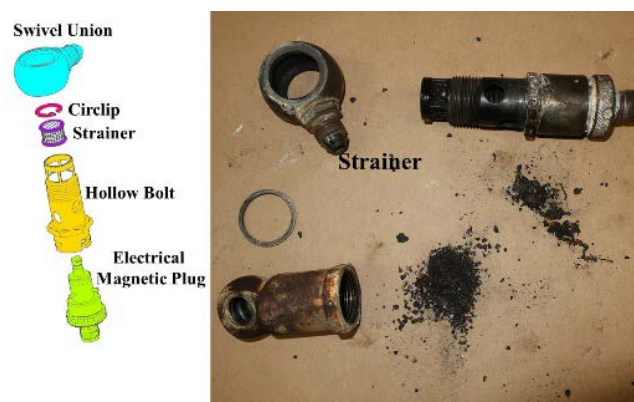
NO. 2 ENGINE REAR BEARING SCAVENGE DEBRIS
